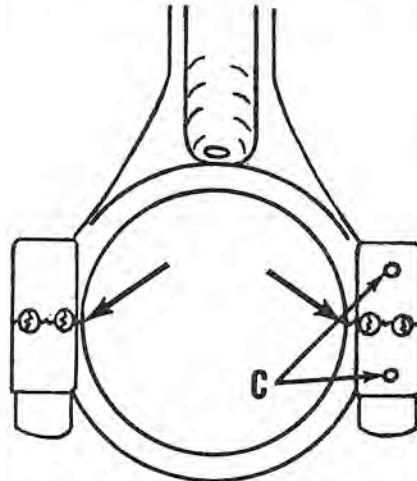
Connecting rod is "fractured" at point of arrows. When installing cap, make sure correlation marks (C) are aligned then work cap back and forth a slight amount until fracture lines match.
